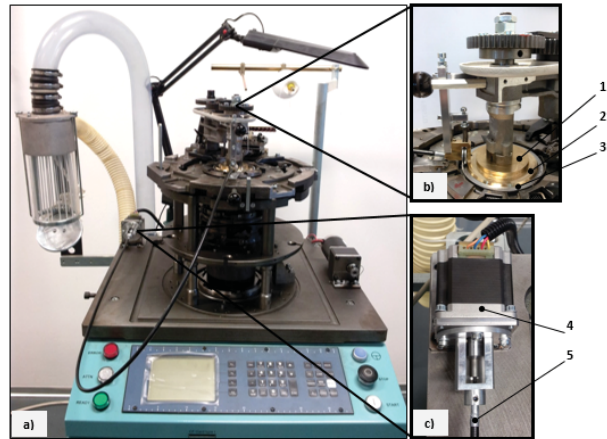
Installation of the individual roller cutter drive system into the Ange 18.1 small diameter knitting machine and detailed display of the basic nodes of the individual roller cutter drive system.
